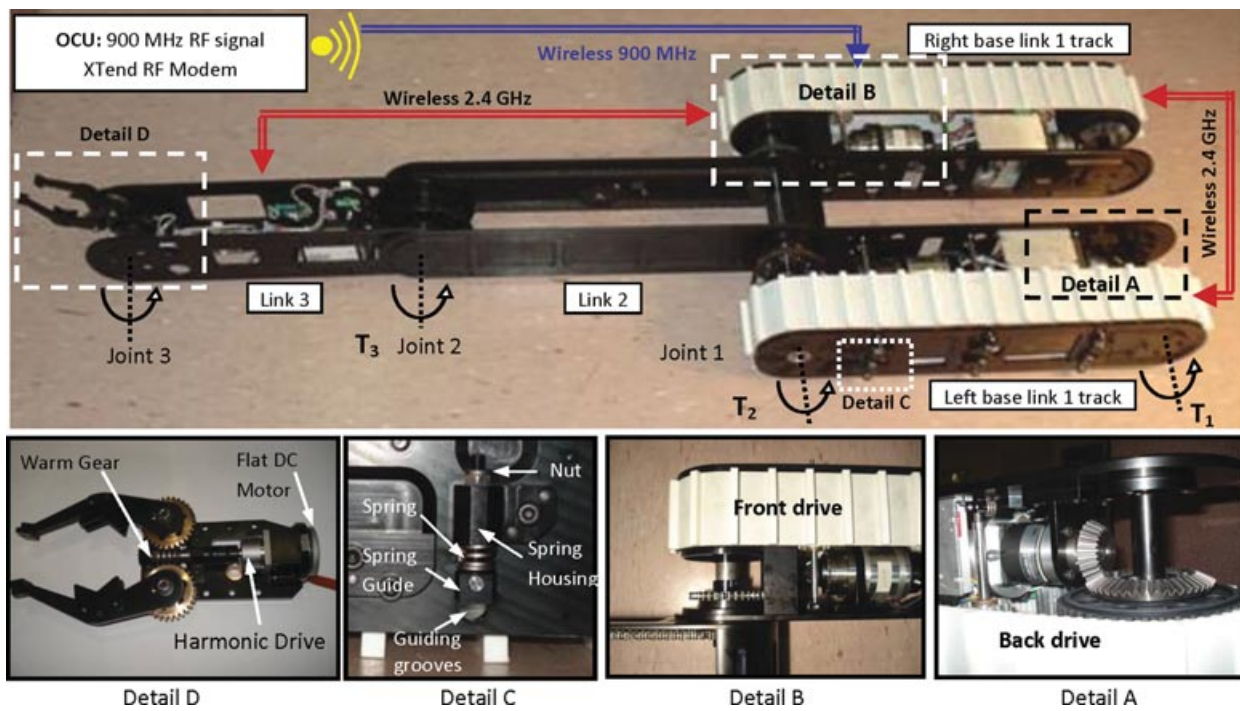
Onboard wireless communication layout and design details (all covers removed).
